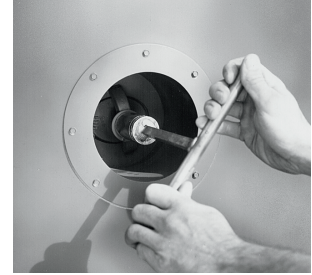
REMOVING HAND ASSEMBLY WITH TEE HANDLE WRENCH
